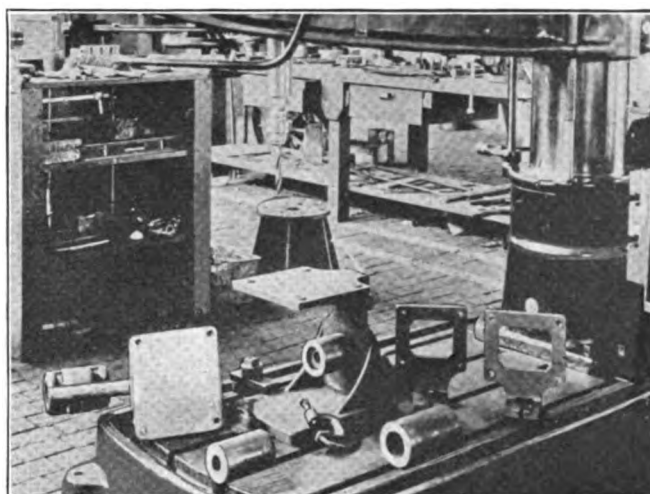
SET OF AUXILIARY JIG PLATES FOR BRACKETS
